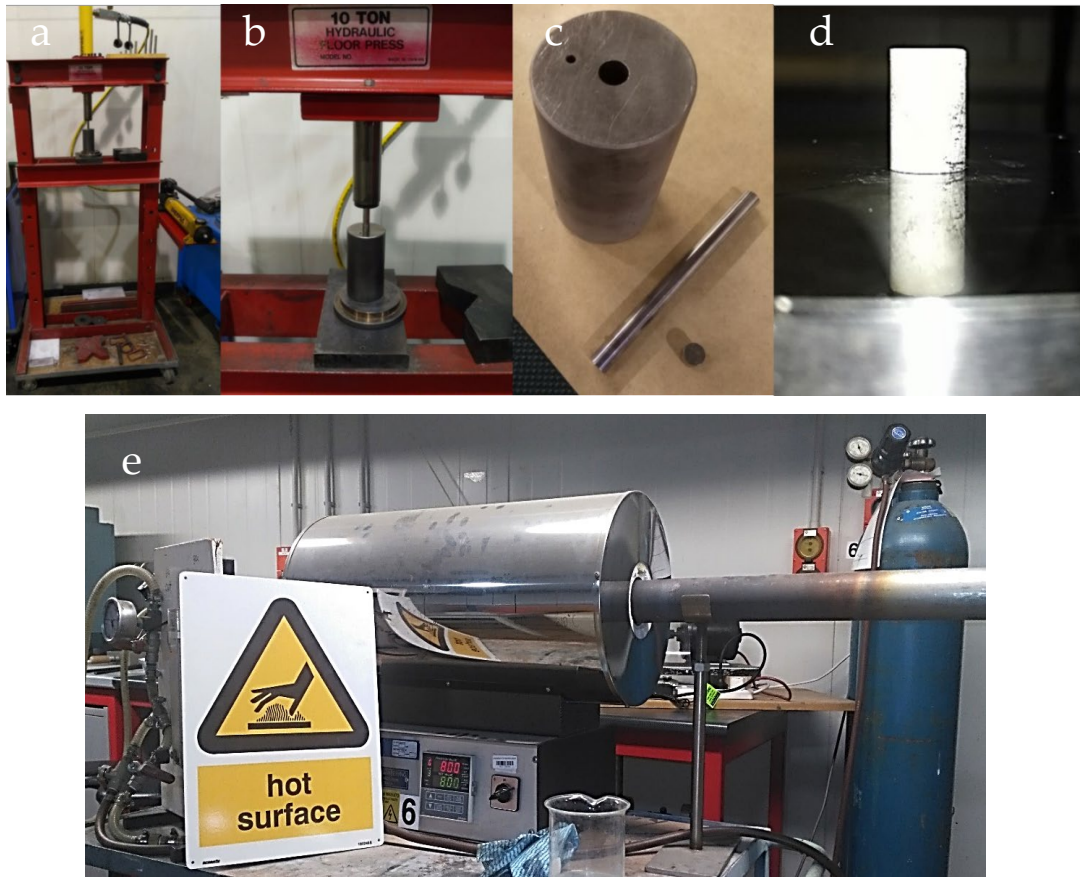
Tools/devices used to make cylindrical compacts, a) and b) represent a hydraulic floor press, c) is a 10 mm die (graphite used for lubrication), d) illustrates a sintered cylindrical composite sample and e) tube furnace.
